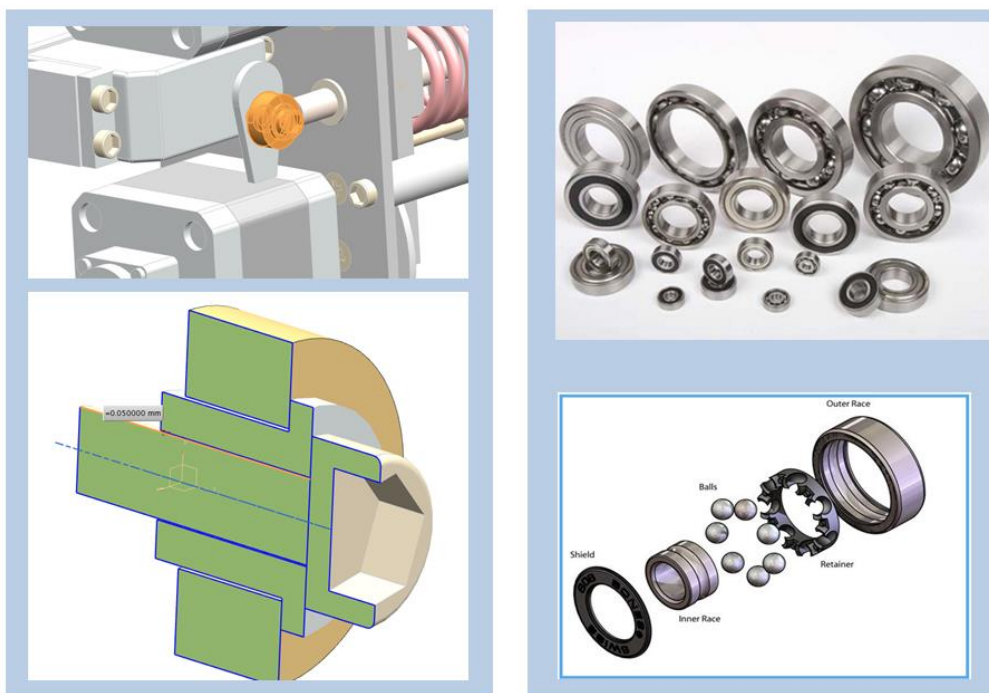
Designed wheel in our brake system (left) and the miniature bearings (right)
